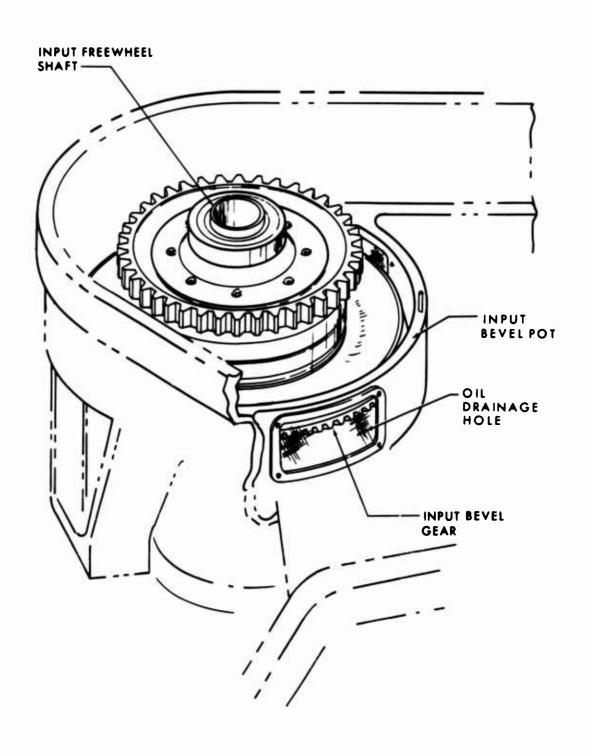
Drainage Ports - Input Bevel Gear Housing.
